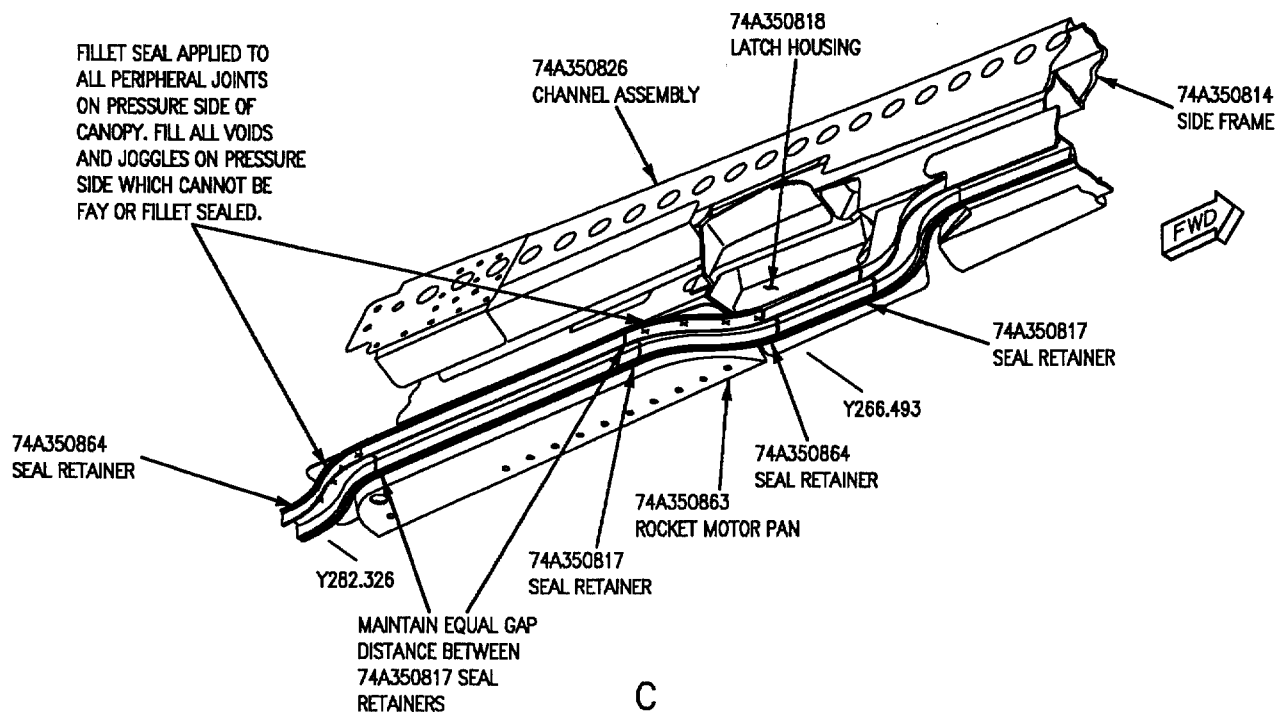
Inspection and Replacement - Seal Retainer (Sheet 2)
